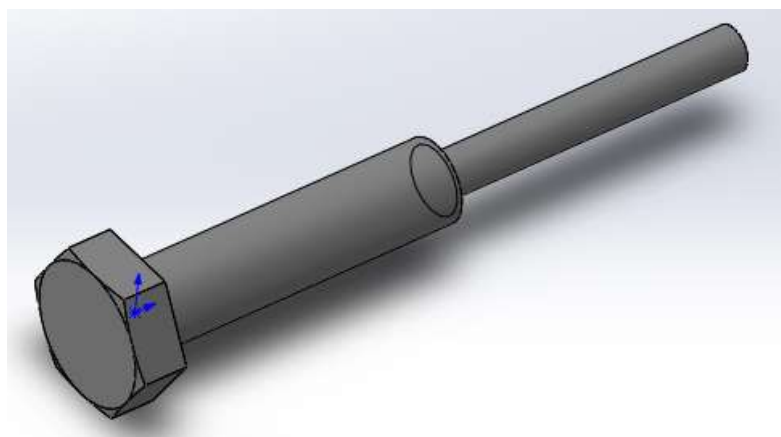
ISO 4017 M6 Spring Mechanized CAD
